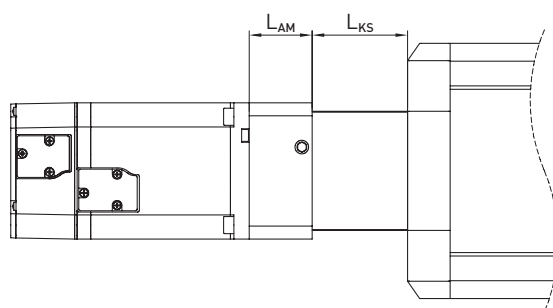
Motor connection of linear tables HT-S without belt drive
